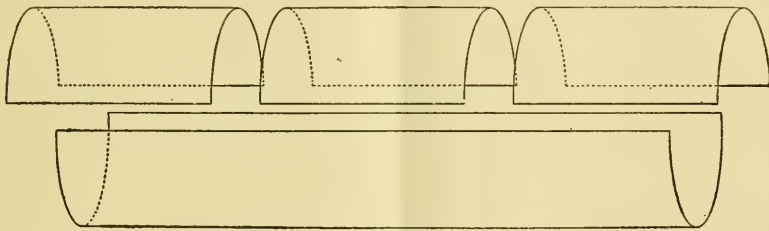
SINGLE BOTTOM-SHEET SHELL.
